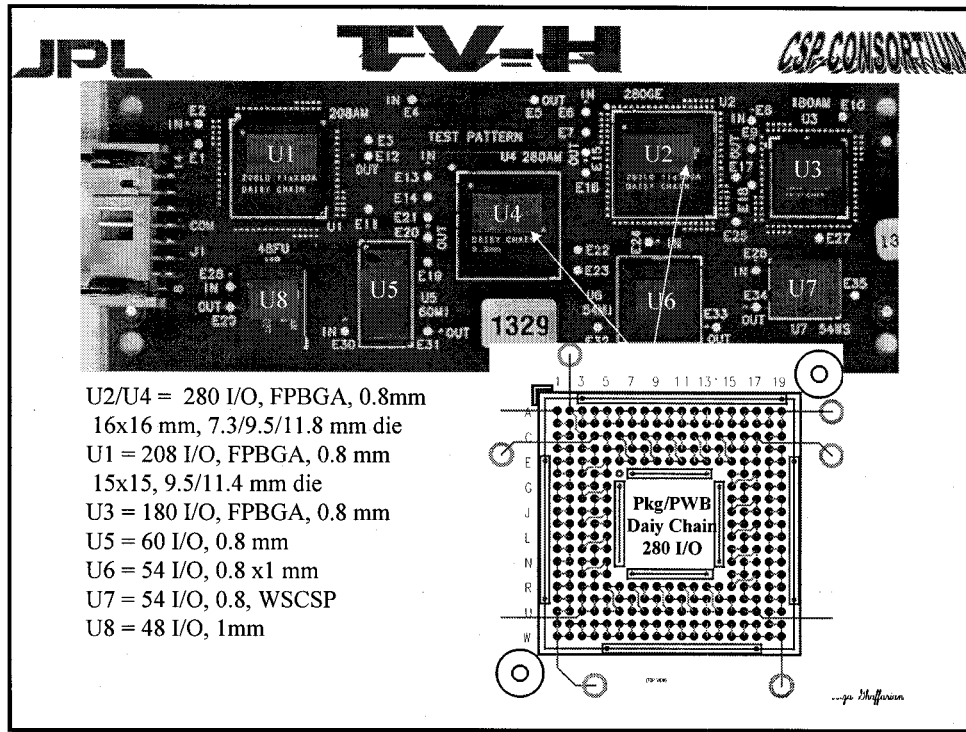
The assembled TV-H with numerous CSP and Fine pitch BGA packages. The package/PWB daisy chain for the 280 I/O FPBGA is shown on the bottom right.
